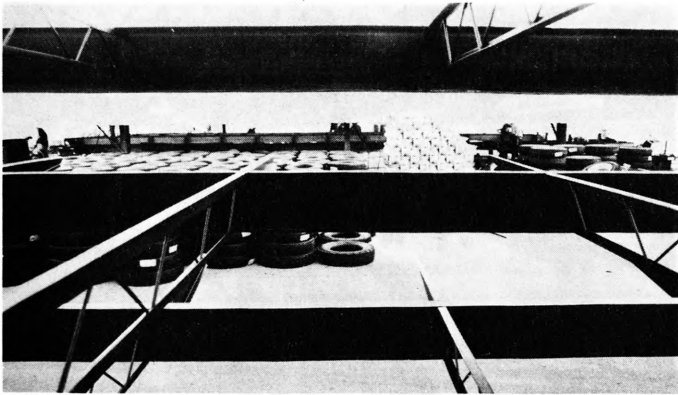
Sub-Assembly Station: Running Gears (Twin Lakes Manufacturing Co., Tampa, Fla.)
